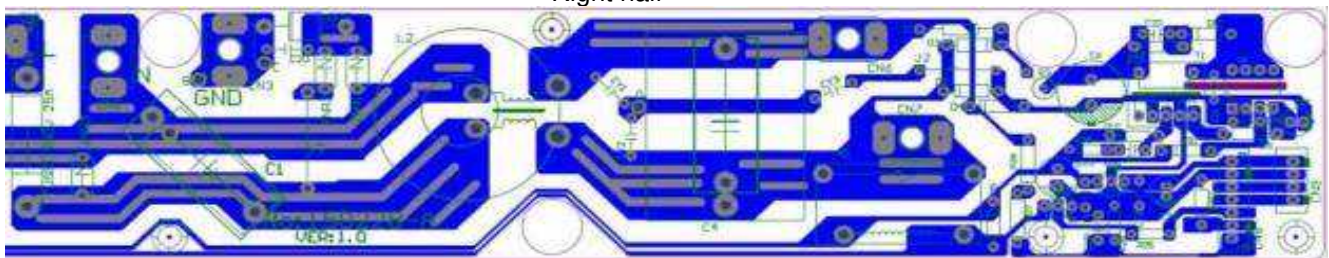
3 - PCB layout of Power PCB for model C74E-BBCC02
